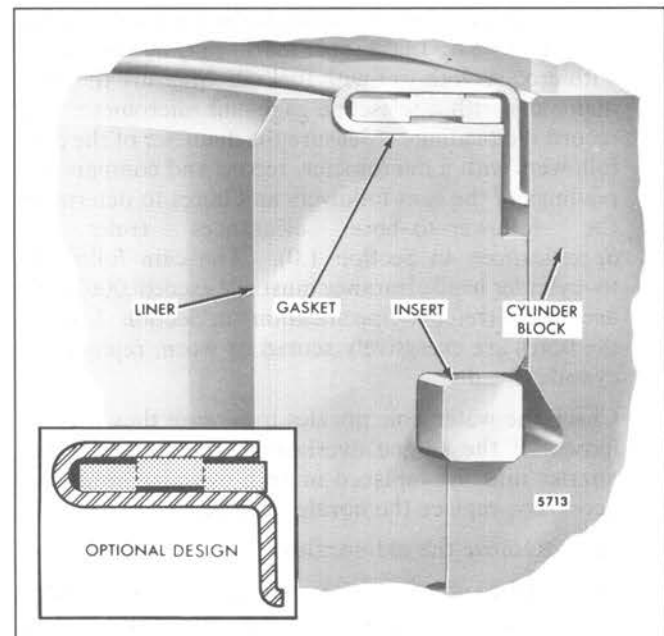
Compression Gasket Mounting in Cylinder Block
